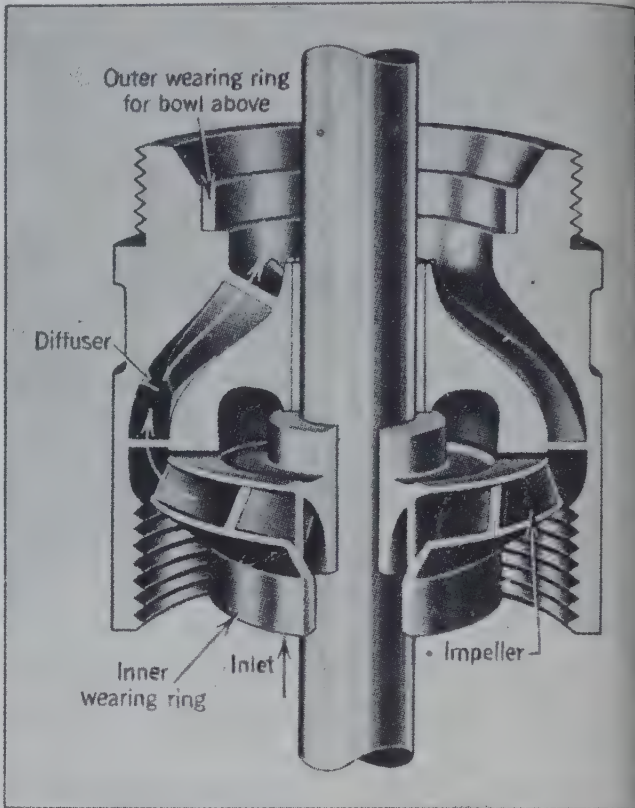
Cutaway view of one-stage of a deep-well pump. (Layne and Bowler, Inc.)
